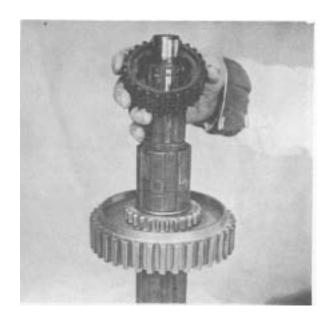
Install 2nd & 3rd shift hub sleeve and sleeve retainer ring.
